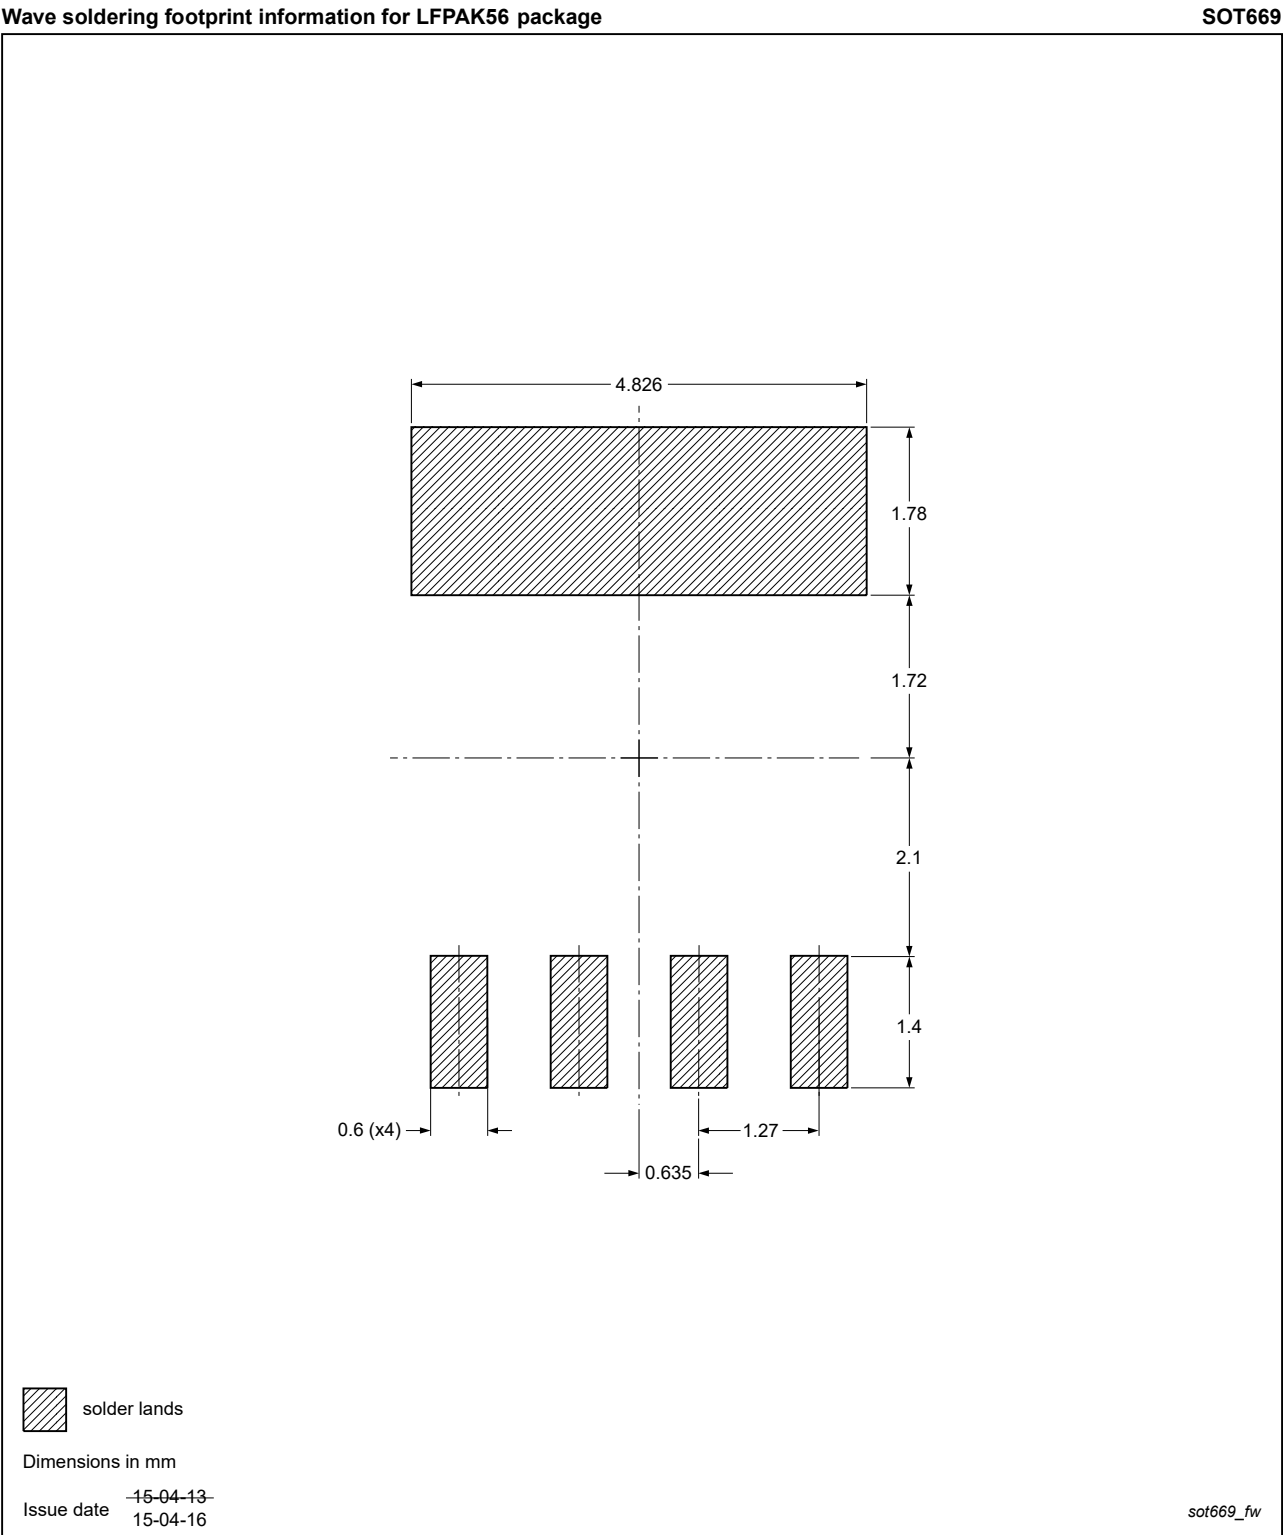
Wave soldering footprint for LPAK56; Power-SO8 (SOT669)
